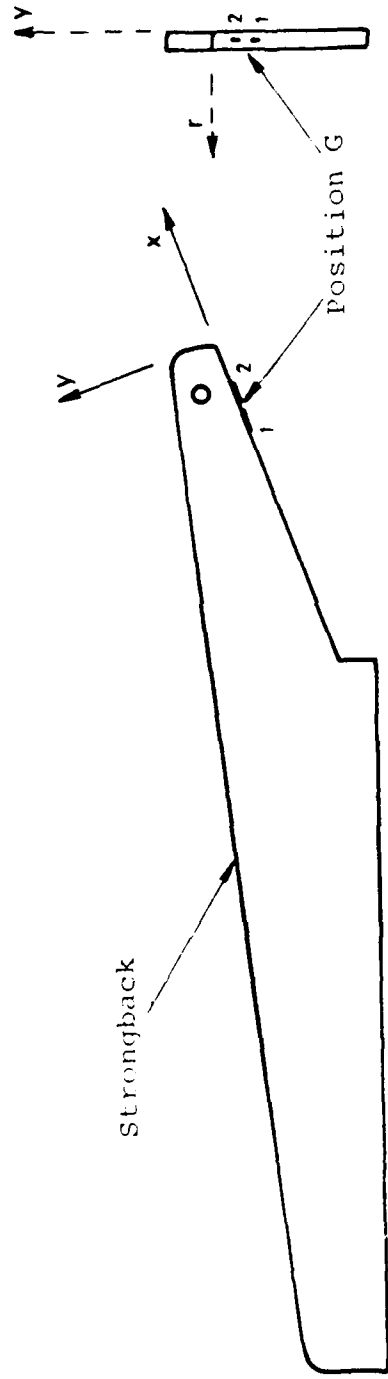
AFT RING - STRONGBACK ASSEMBLY
